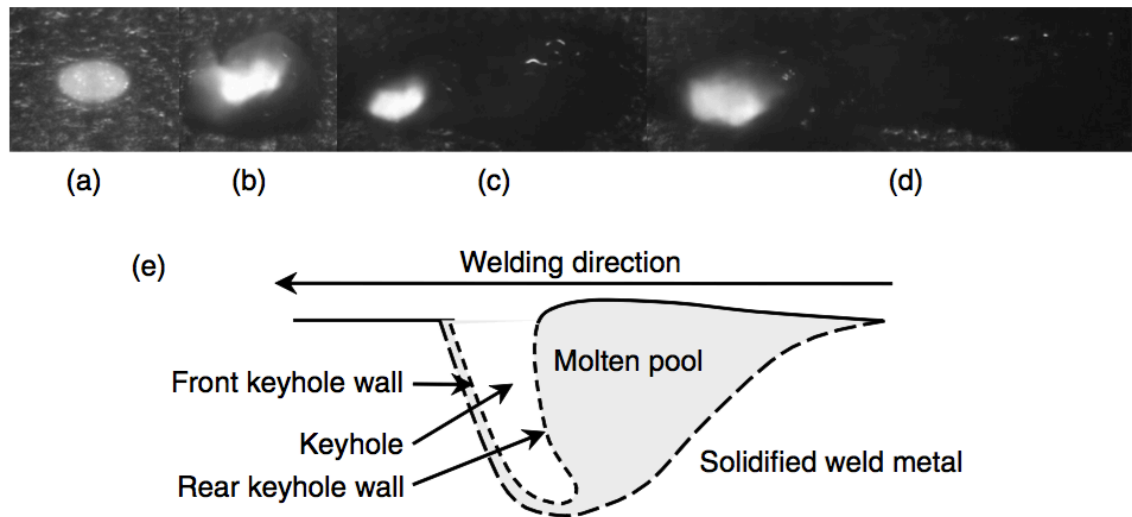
Formation of keyhole laser-welding process in C-Mn steel, (a) surface melting, (b) vaporisation of substrates occurs, (c) keyhole traverses across the workpiece and weld pool begins to form, and (d) the weld-pool length increases and stabilises; (e) schematic of the side view of a keyhole (7, p. 91)
